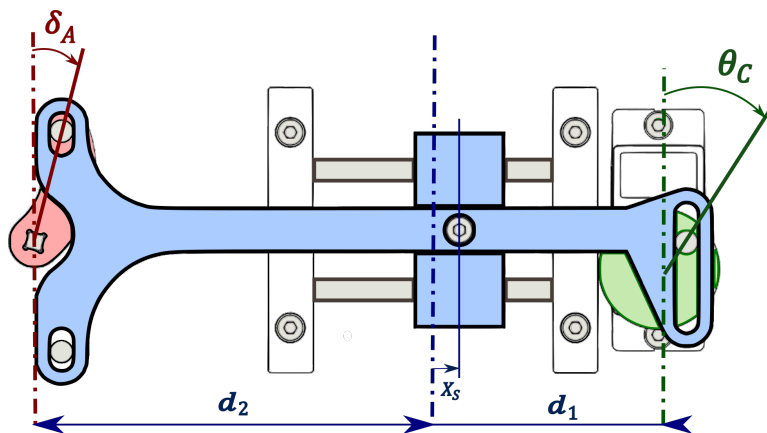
The control surfaces driving mechanism based on the scotch-yoke mechanism.
